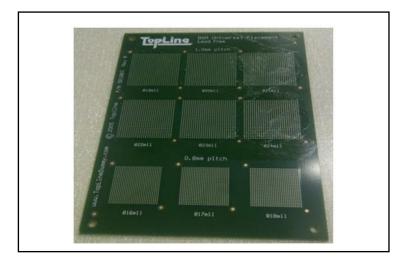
Image of the lead-free universal FR4 BGA printed circuit board
